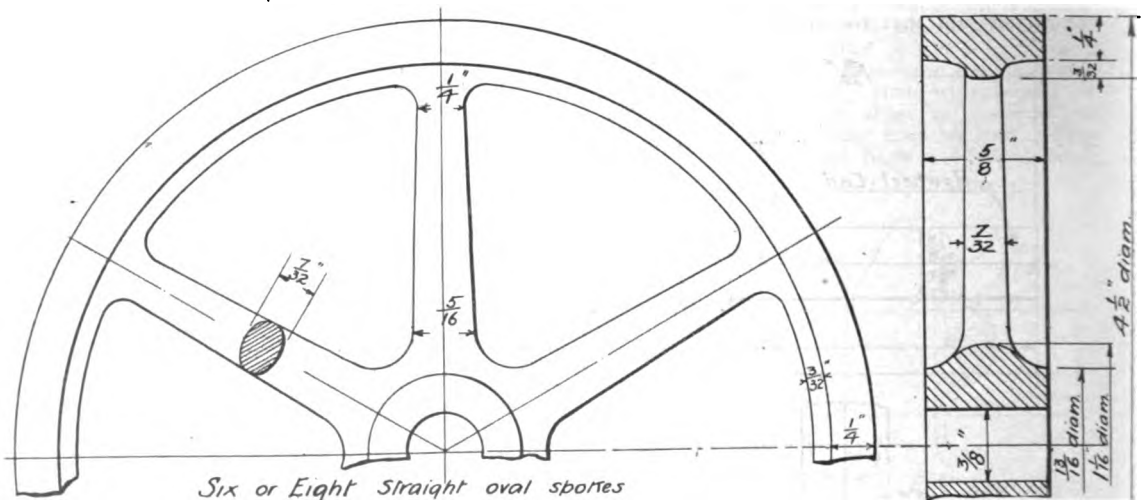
FLYWHEEL FOR UNDERTYPE ENGINE.
